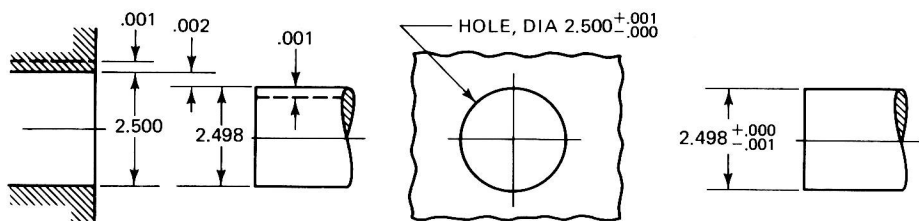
(a) comprises what would nominally be called a $2\frac{1}{2}$ -in. shaft fit. It is noted, however, that the $2\frac{1}{2}$ -in. dimension occurs on the drawing for the hole rather than for the shaft. These dimensions will permit the hole to be finished with a $2\frac{1}{2}$ -in. stock reamer while the shaft is machined to fit. Such dimensioning is called the *basic hole system*.
